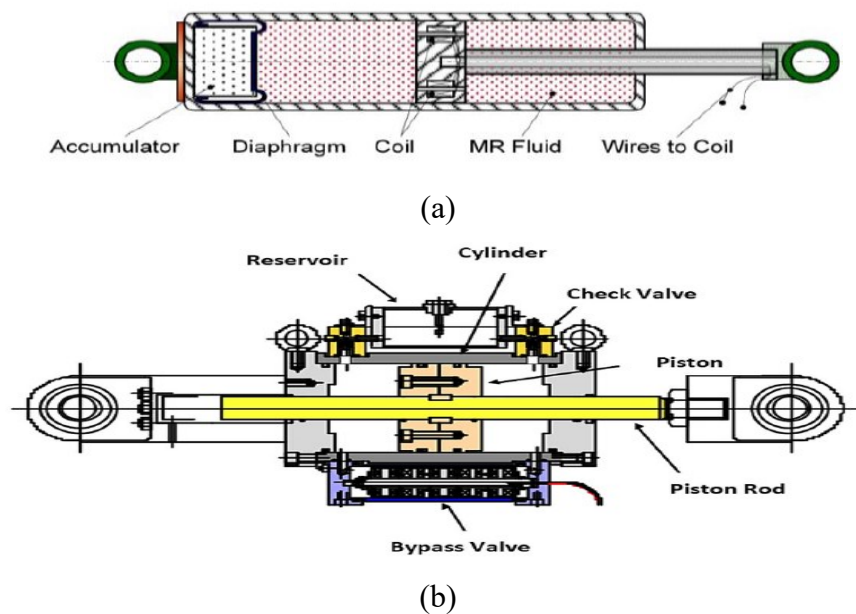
Construction of MRFD (a) internal valve [37] (b) bypass valve [69].
